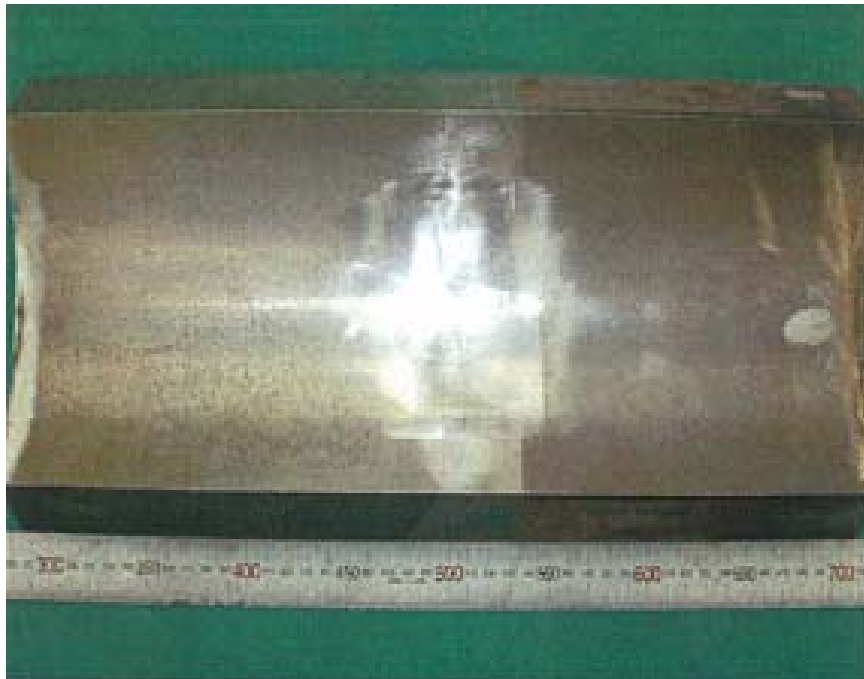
PINC Block 2.3 from JNES – PZR Surge Line to Safe-End Dissimilar Metal Weld
